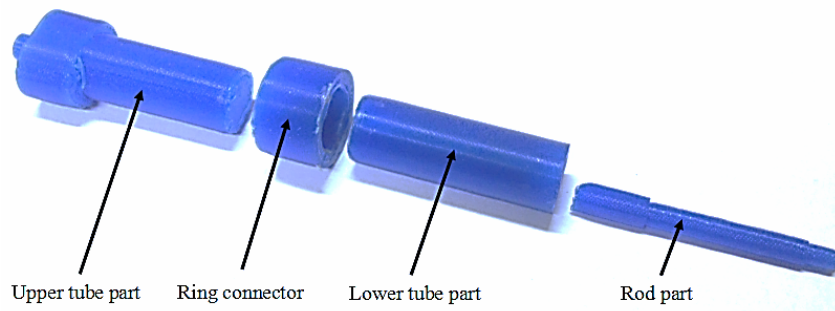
A preliminary printed prismatic pair for the LARM tripod Locomotor.
